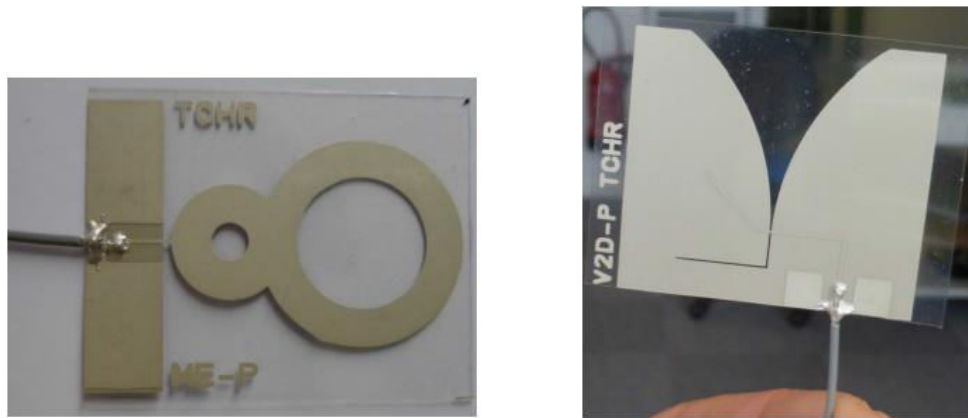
View of a coaxial interconnection directly soldered to the PCB (courtesy of Technicolor Connected Home Company)
